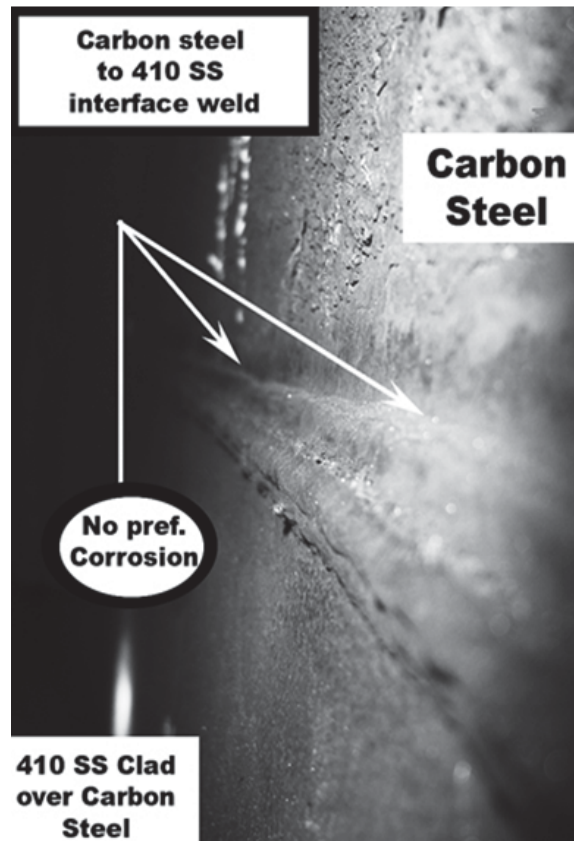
410 Stainless Steel Clad to Carbon Steel Interface Weld
